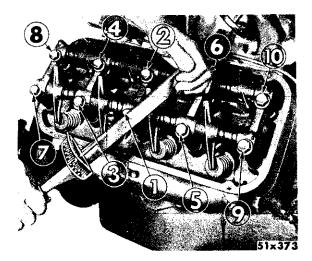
Tightening Cylinder Head Bolts (FirePower)
